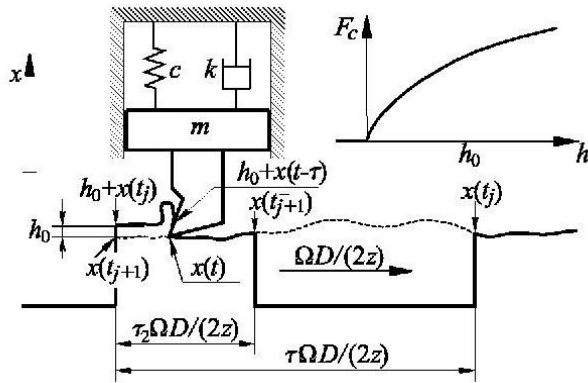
Mechanical model. Note the difference from the model in Fig. 1: the feed is provided by the tool while the cutting speed is provided by the motion of the (rotating) workpiece.
